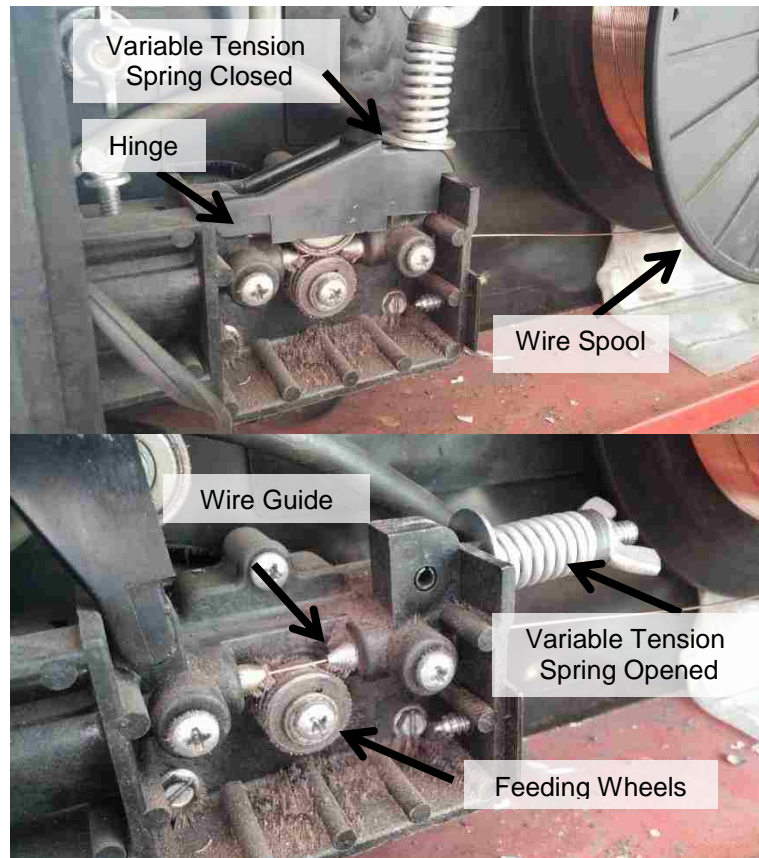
Photograph Showing the Clamping Action Used in a TIG Welder Wire Feeder.
